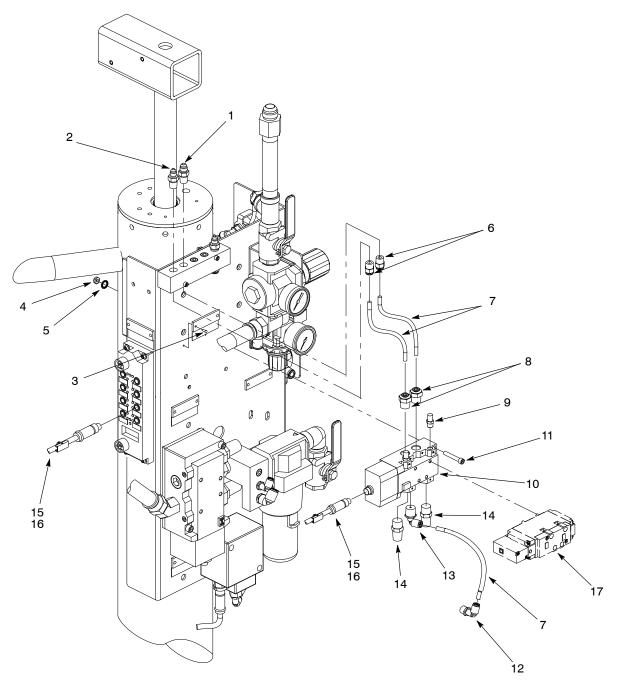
24 Vdc ISO 5592/2 Size 1 Valve Base with Cable for Device Net I/O Block
